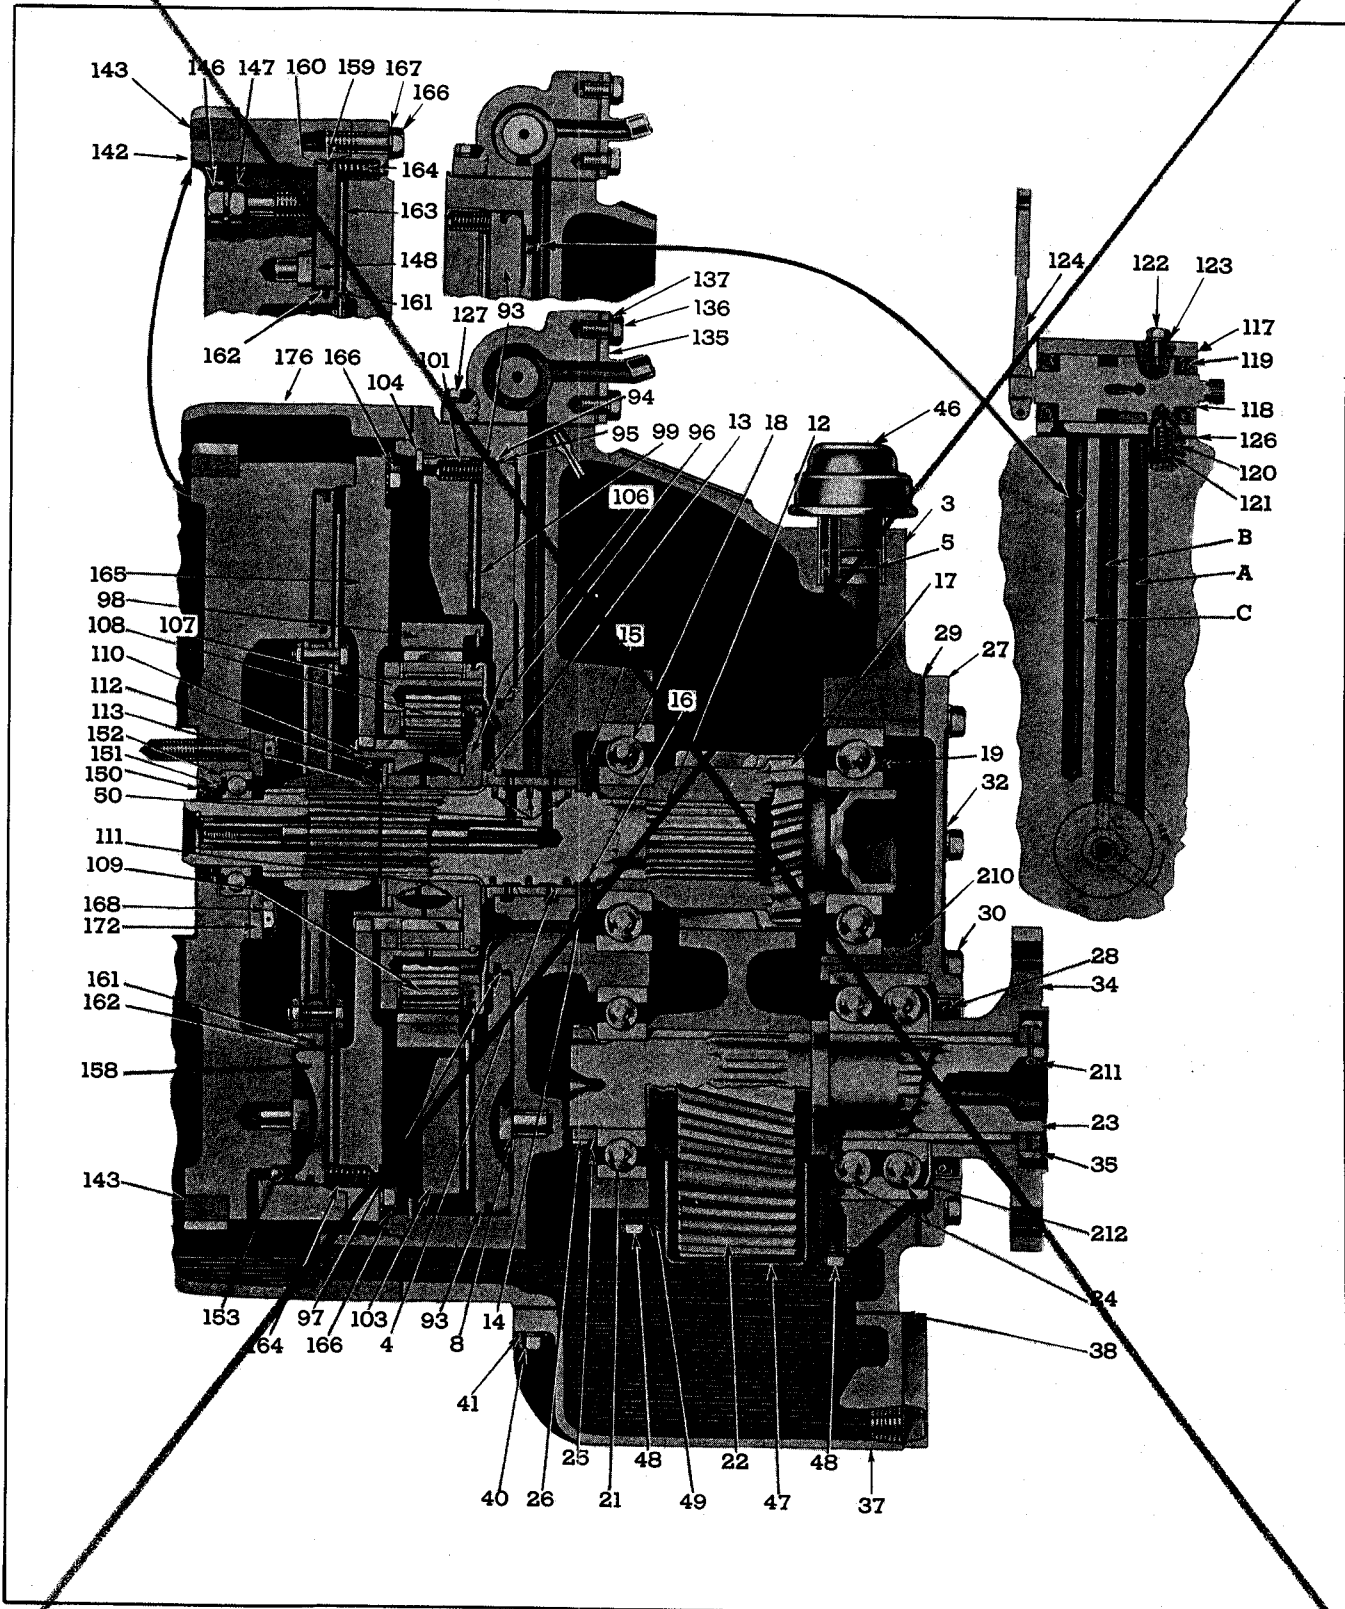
Typical Hydraulic Marine Gear Assembly—M Gear Shown.
